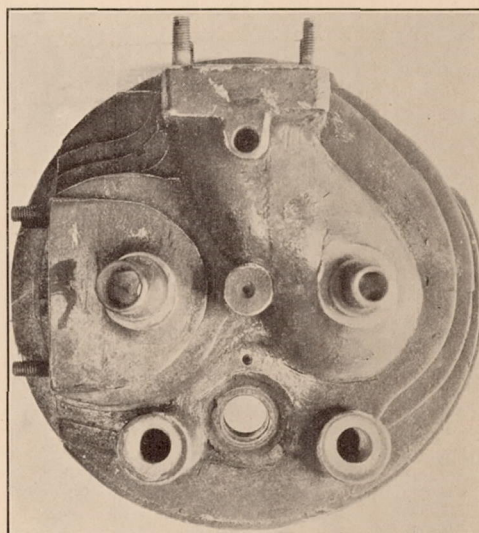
Top view of cylinder head, showing location of hole for thermocouple plug between spark plug and center of cylinder
